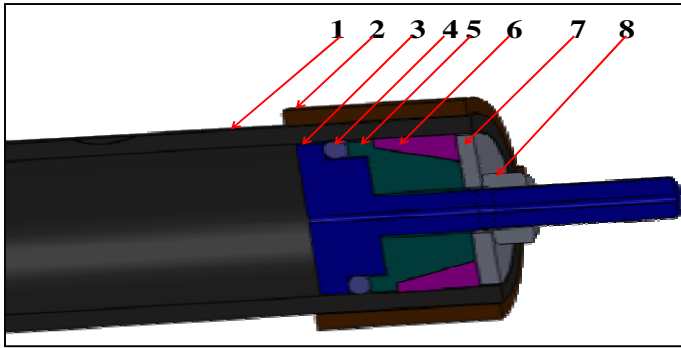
Details of the test apparatus. 1: PE100; 2: chucking; 3: flange; 5, 6: compressing parts; 4: gasket; 7: chucking; 8: clamping nut.
